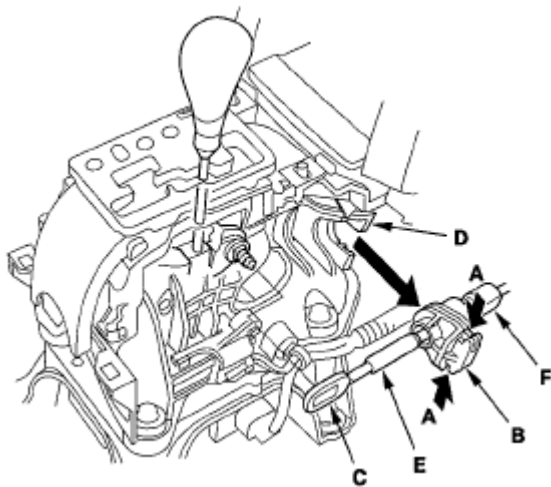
Removing Shift Cable From Shift Lever Bracket Base
